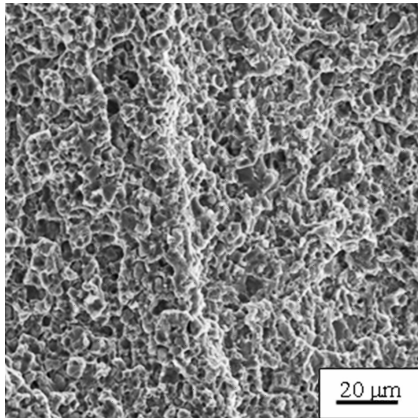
Detail of the fracture surface of the sample processed using the A treatment
